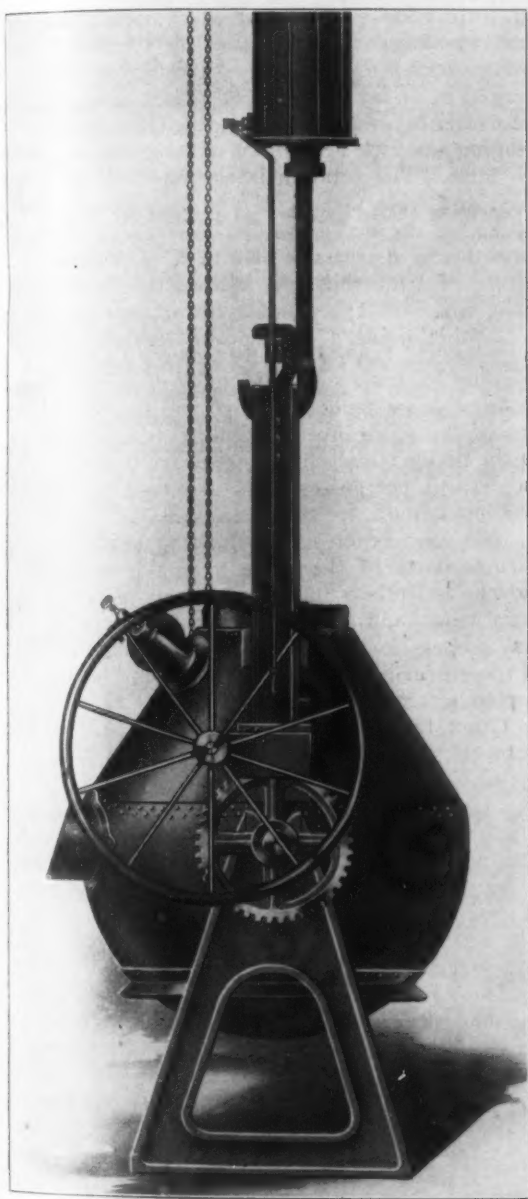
An End View of the Schwartz Portable Melting Furnace, Manufactured by the Hawley Down Draft Furnace Company, Chicago, Ill.
